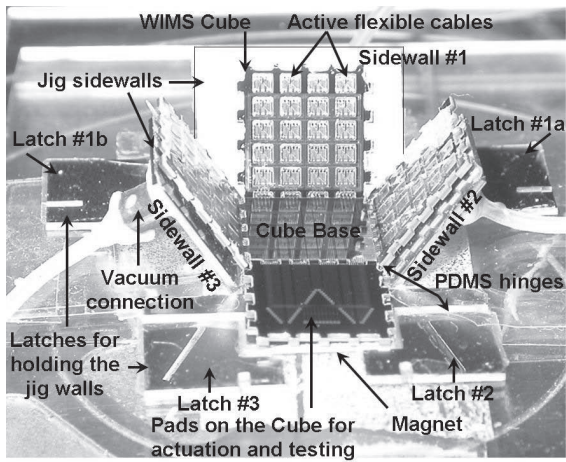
A WIMS Cube with active cables during assembly. The platform is a jig with latches and PDMS hinges.
